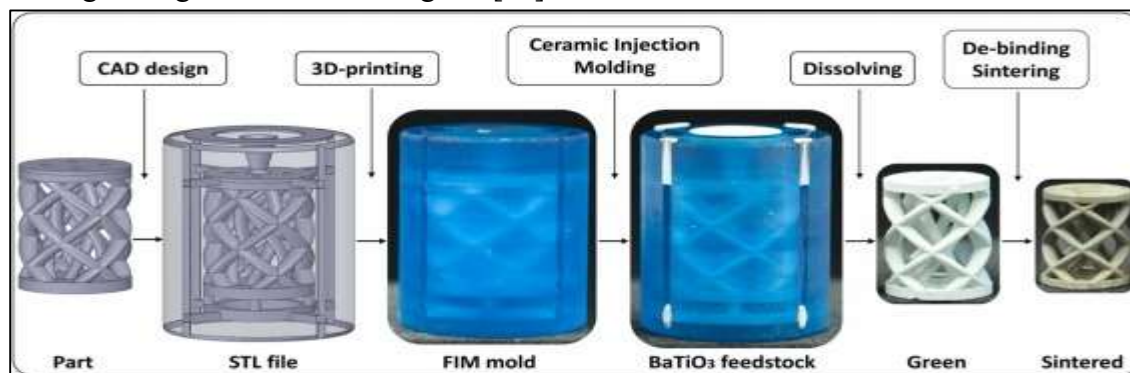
The FIM process steps exemplified by fabricating a ceramic double helix (BaTiO₃). The CAD model of the part and the design of the FIM mold before it is 3D-printed, injection-molded and dissolved, and finally, de-binding and sintering of the ceramic part [32]
